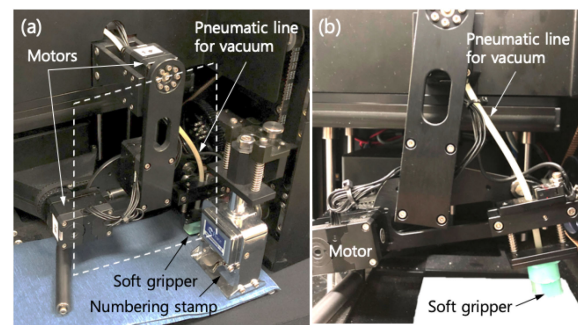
(a) Prototype of pattern-numbering machine composed of soft gripper, three degrees-of-freedom robot arm, and numbering stamp. (b) Magnified photo of dotted box in (a).
